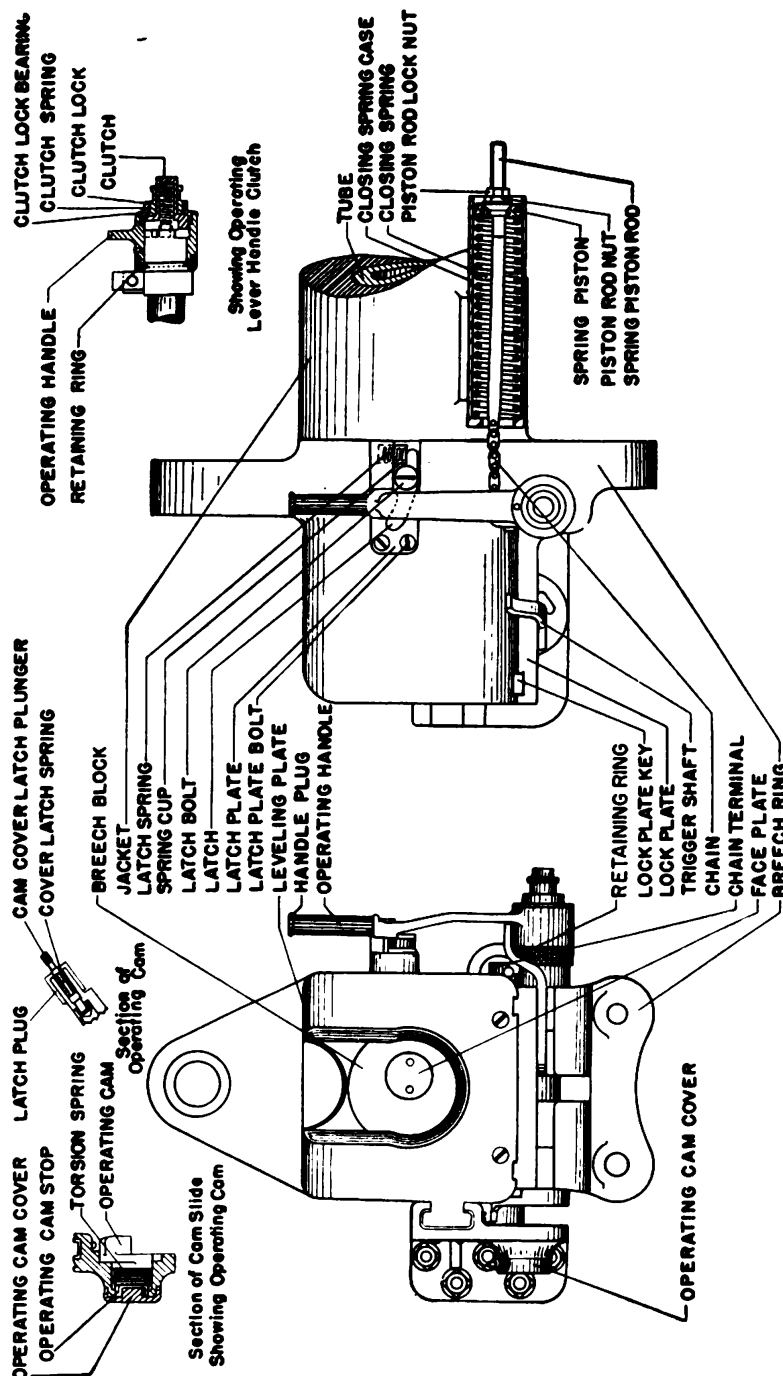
Breech mechanism assembly, 3-inch AA gun M1917.
